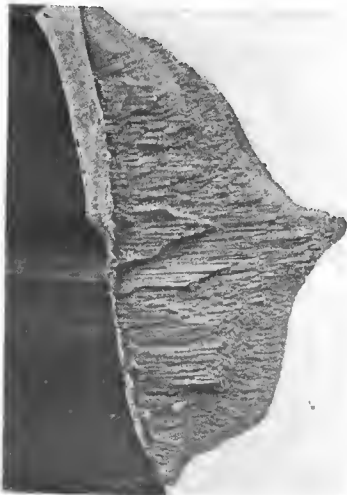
Fracture of Krupp steel in a test, showing long fiber.
